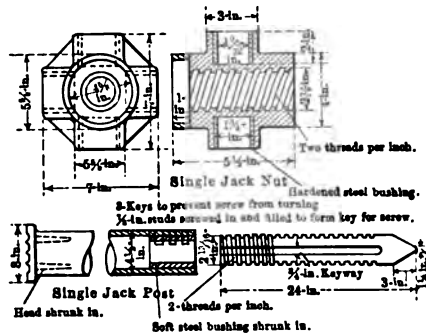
DETAILS OF DRILL COLUMN WITH REMOVABLE SCREW.
